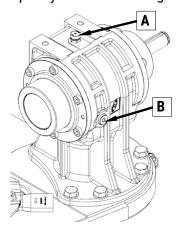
Point of oil inspection a) and manner of oil replacement in cutterbar b)
